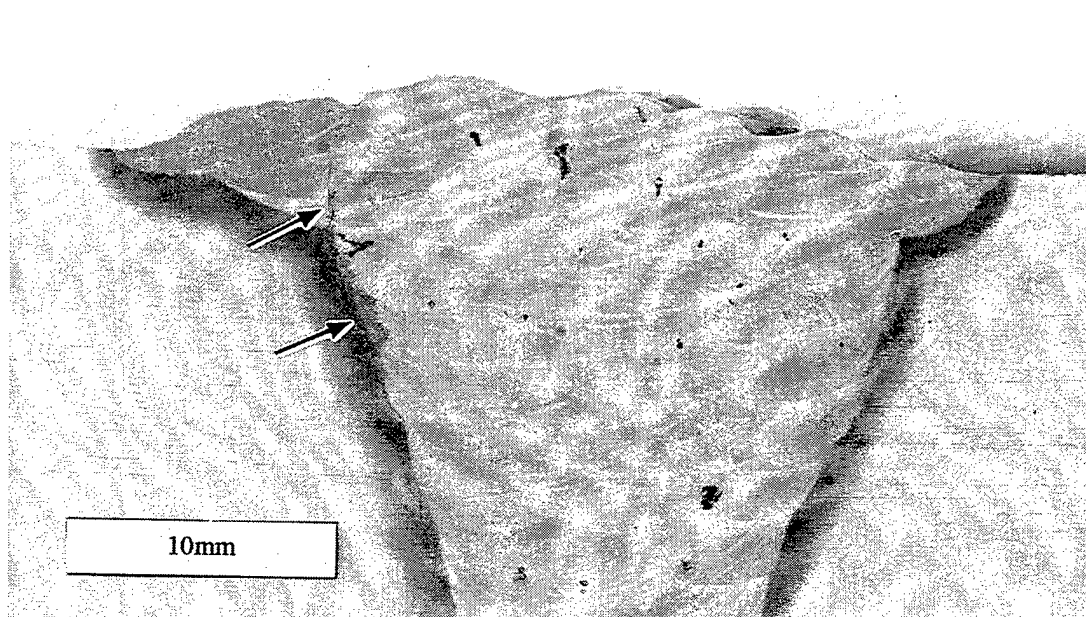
Macro photograph of UWW05 weld sample – Underbead cracks are indicated by arrows
